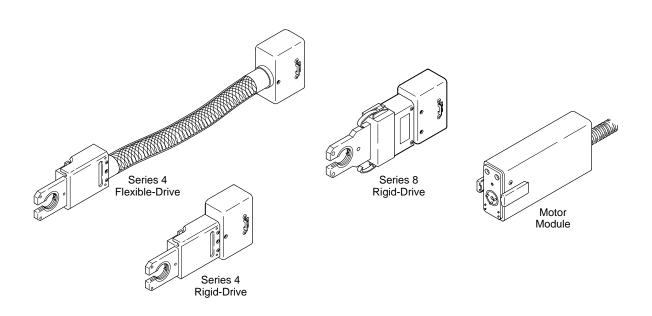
Rigid-Drive and Flexible-Drive Micro Weld Heads
